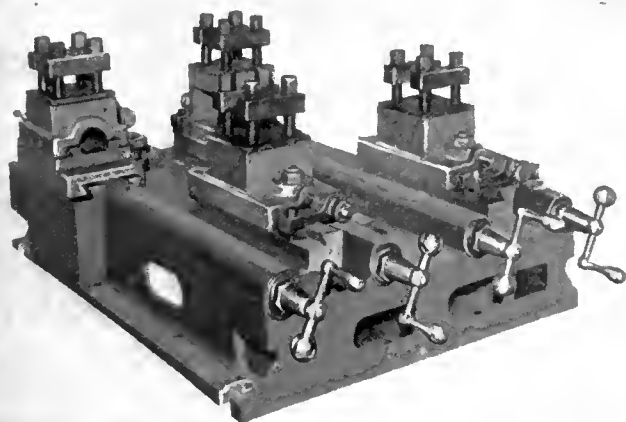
OPERATING SIDE OF FOUR-POST TOOL HOLDER FOR SHELL LATHE.
